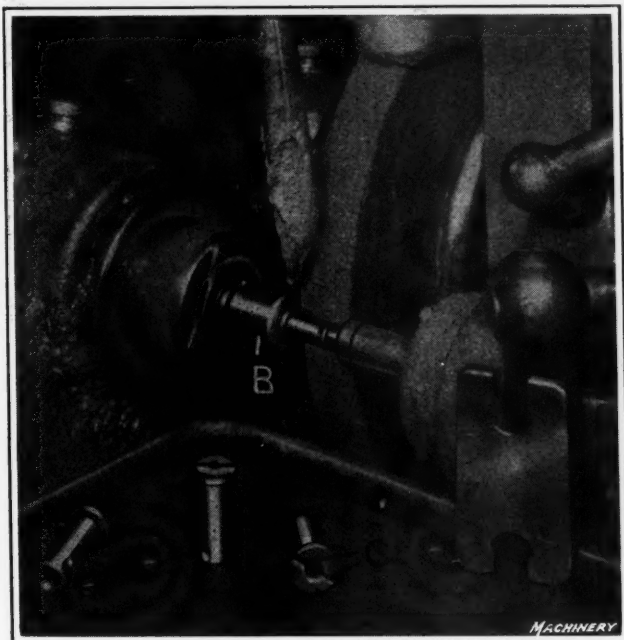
Machine equipped for performing Cylindrical Grinding Operation on Small Flanged Pins
